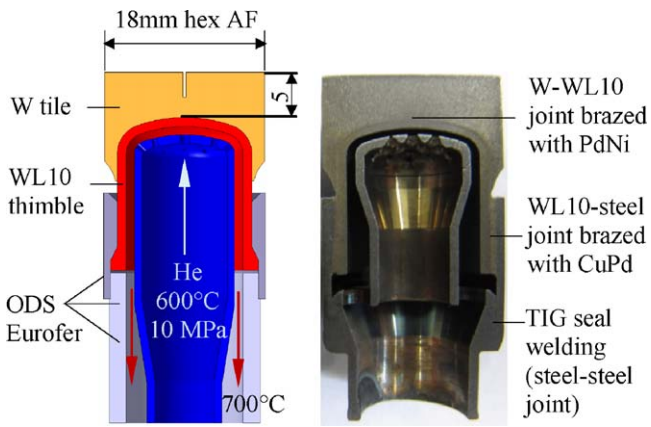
Reference design HEMJ [1], left: 1-finger module, right: brazed joints of the parts.
